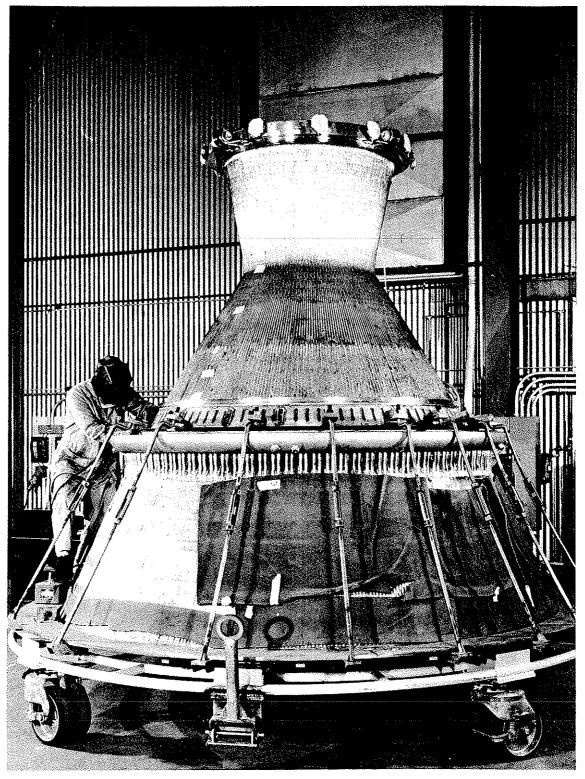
M-1 Rocket Engine. Welding Fuel Torus on First Article Cooled Combustion Chamber.
